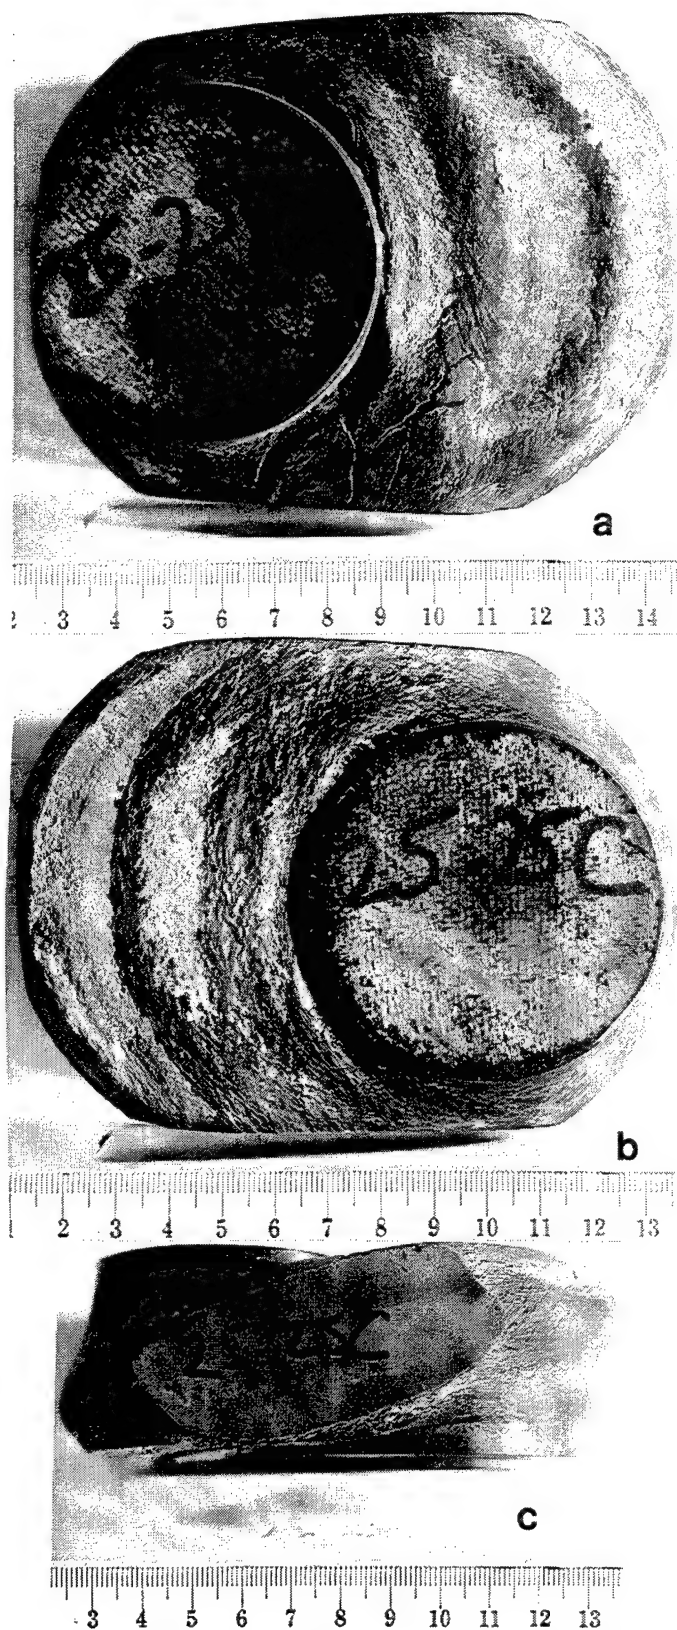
The (a) top, (b) bottom and (c) side views of the sheared Ti-25Al-25Nb workpiece after the initial forging run.
